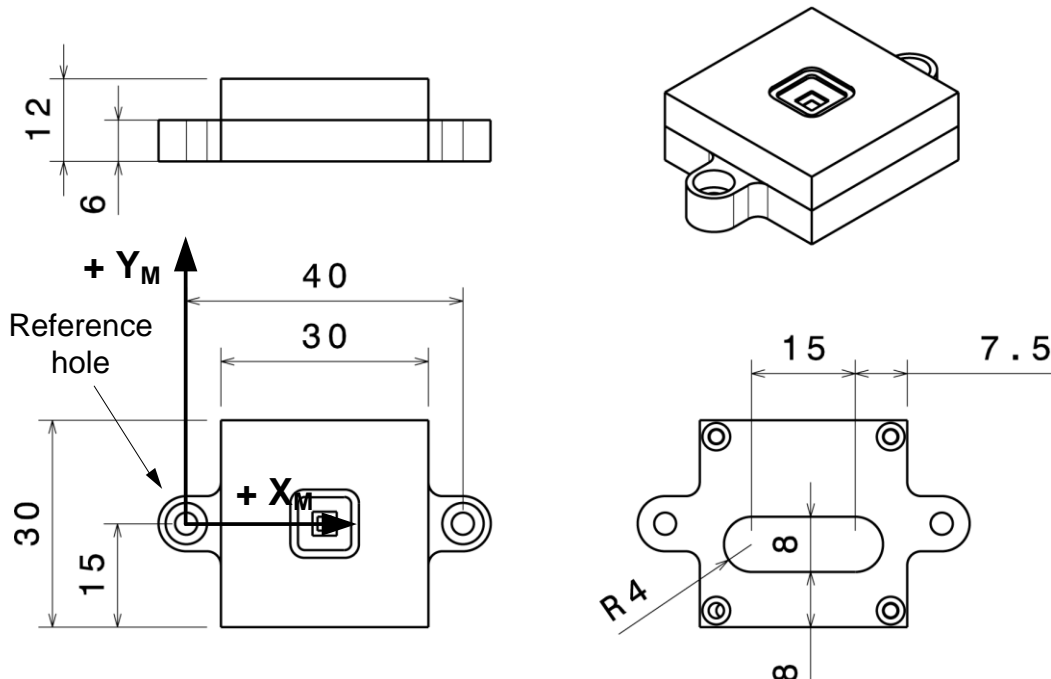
Mechanical layout and interface dimensions of SSOC-A60
